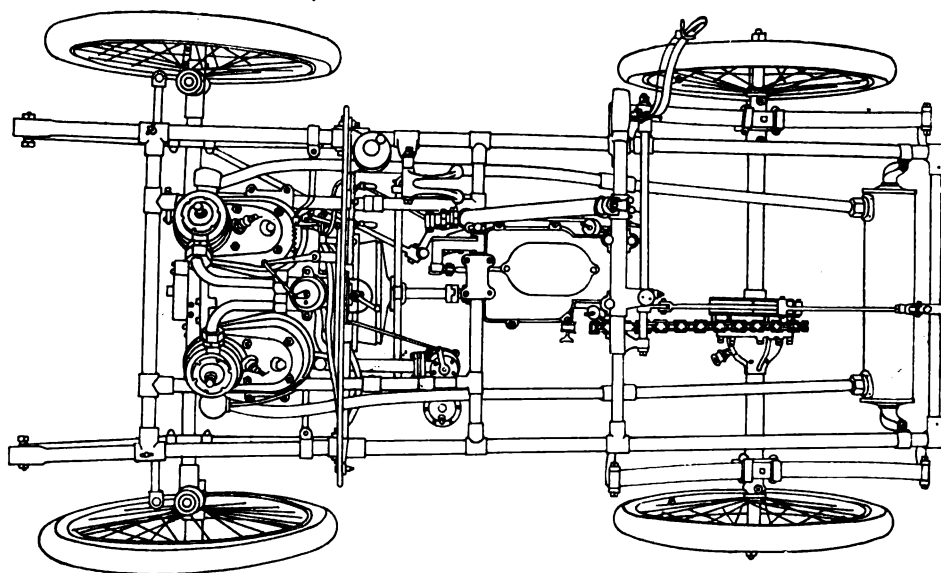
PLAN OF COTTEREAU VOITURETTE.
